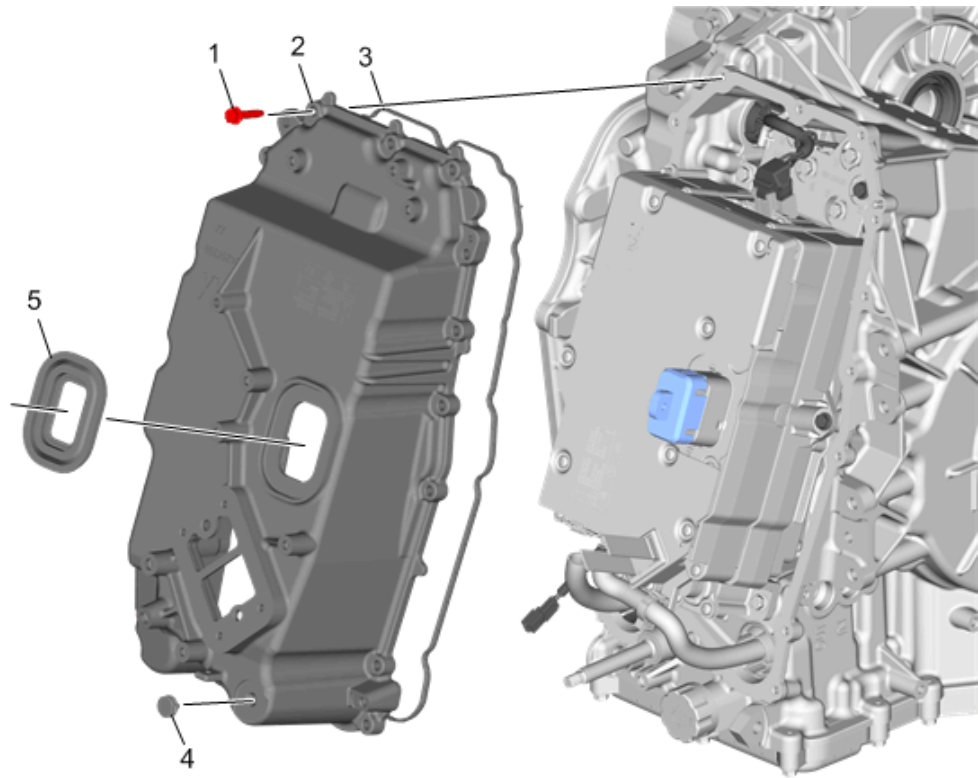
Drive Motor Power Inverter Module Cover And Components
